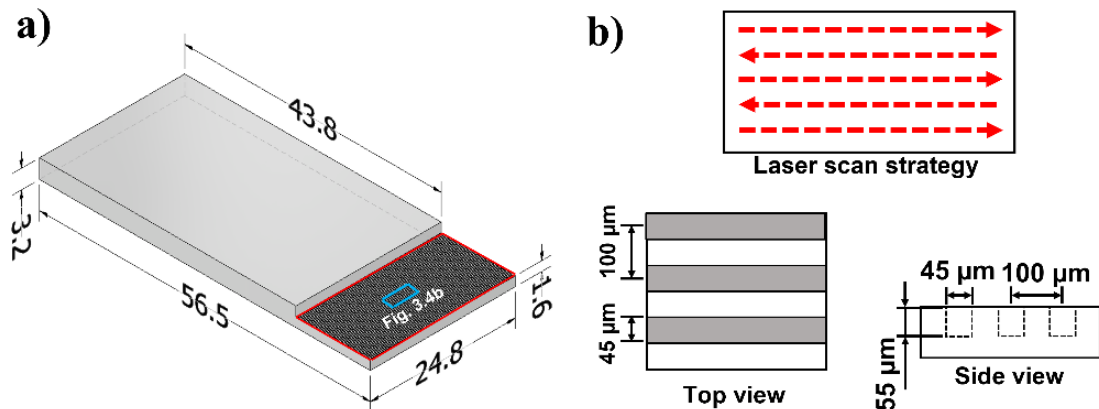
Laser texturing design over AA6061 substrates. a) Laser textured AA6061 insert; b) Laser scan strategy and grooves dimensions. Metal inserts dimensions are given in mm.
